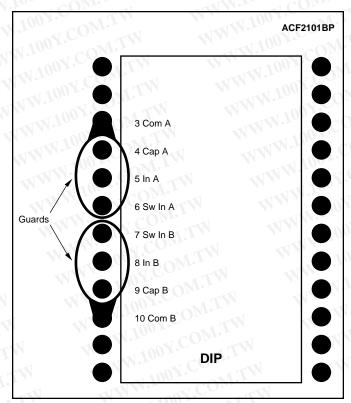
PC Board Layout Showing "Guard" Traces for Input, DIP. Both top and bottom of board should be guarded. .100Y.80M.TW
